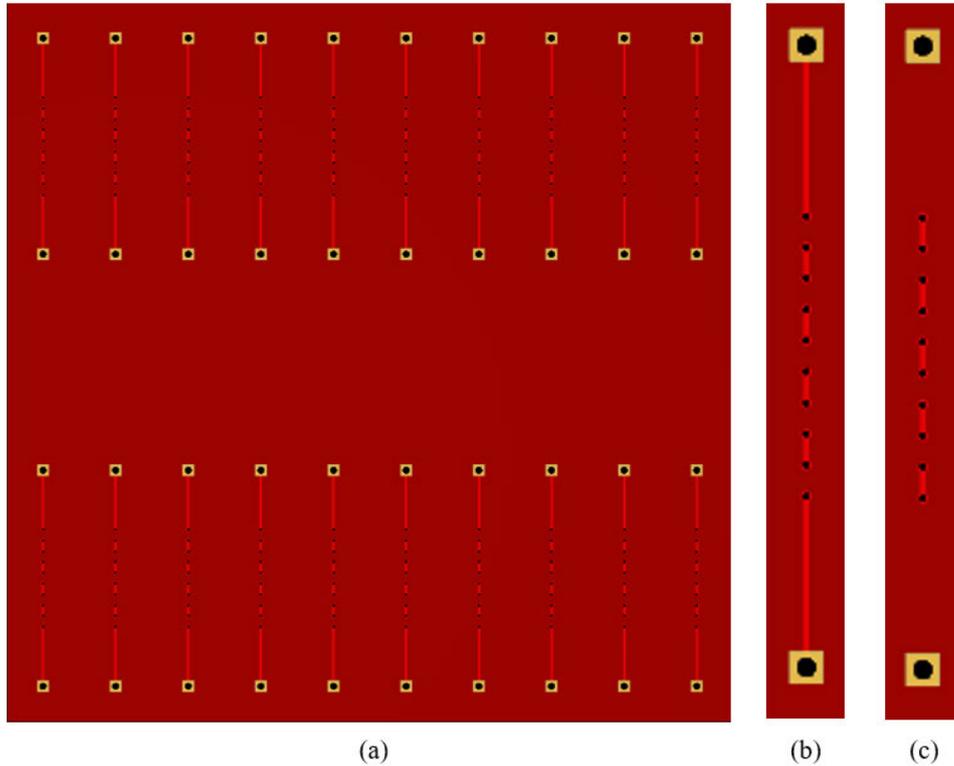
PCB Design for experiment with ten vias on a circuit, (a) the PCB with two rows of ten testing circuits, (b) the top layer view of a single circuit, (c) the bottom layer view of a single circuit.
